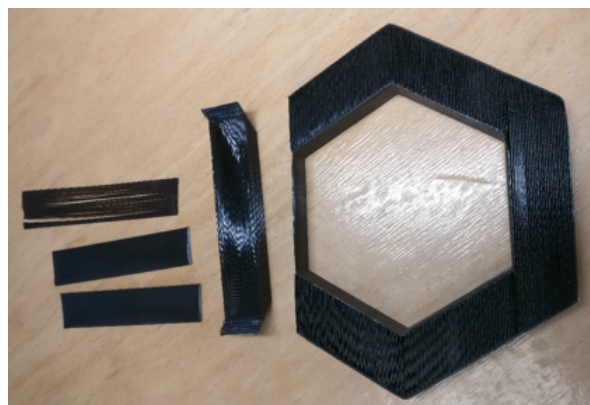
Hexagonal 3D printed part with specimens cut out of it
